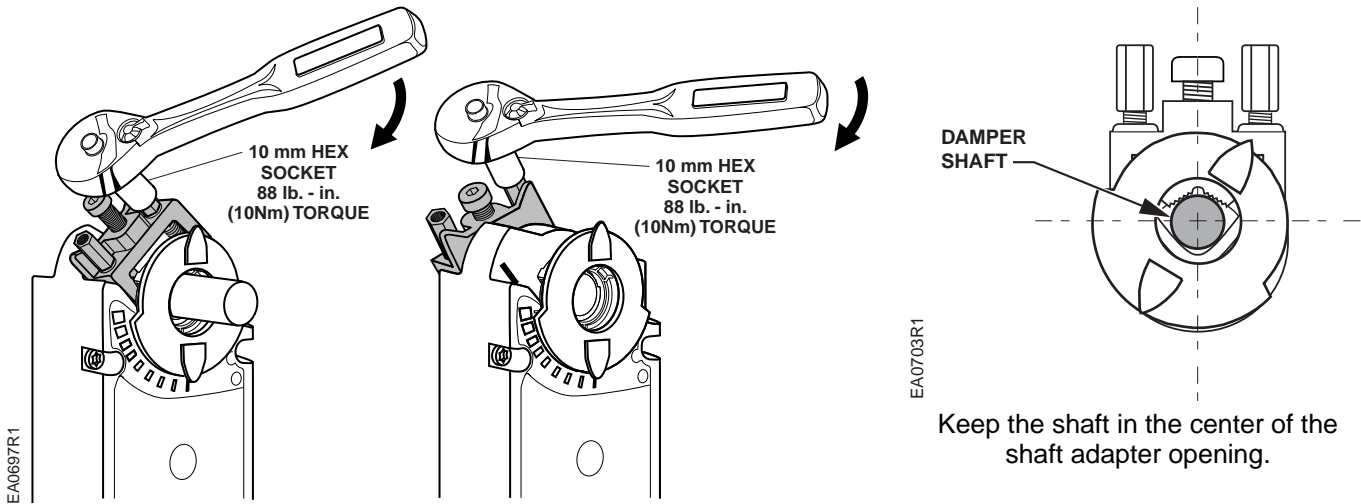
Fasten the Shaft Adapter to the Damper Shaft.
